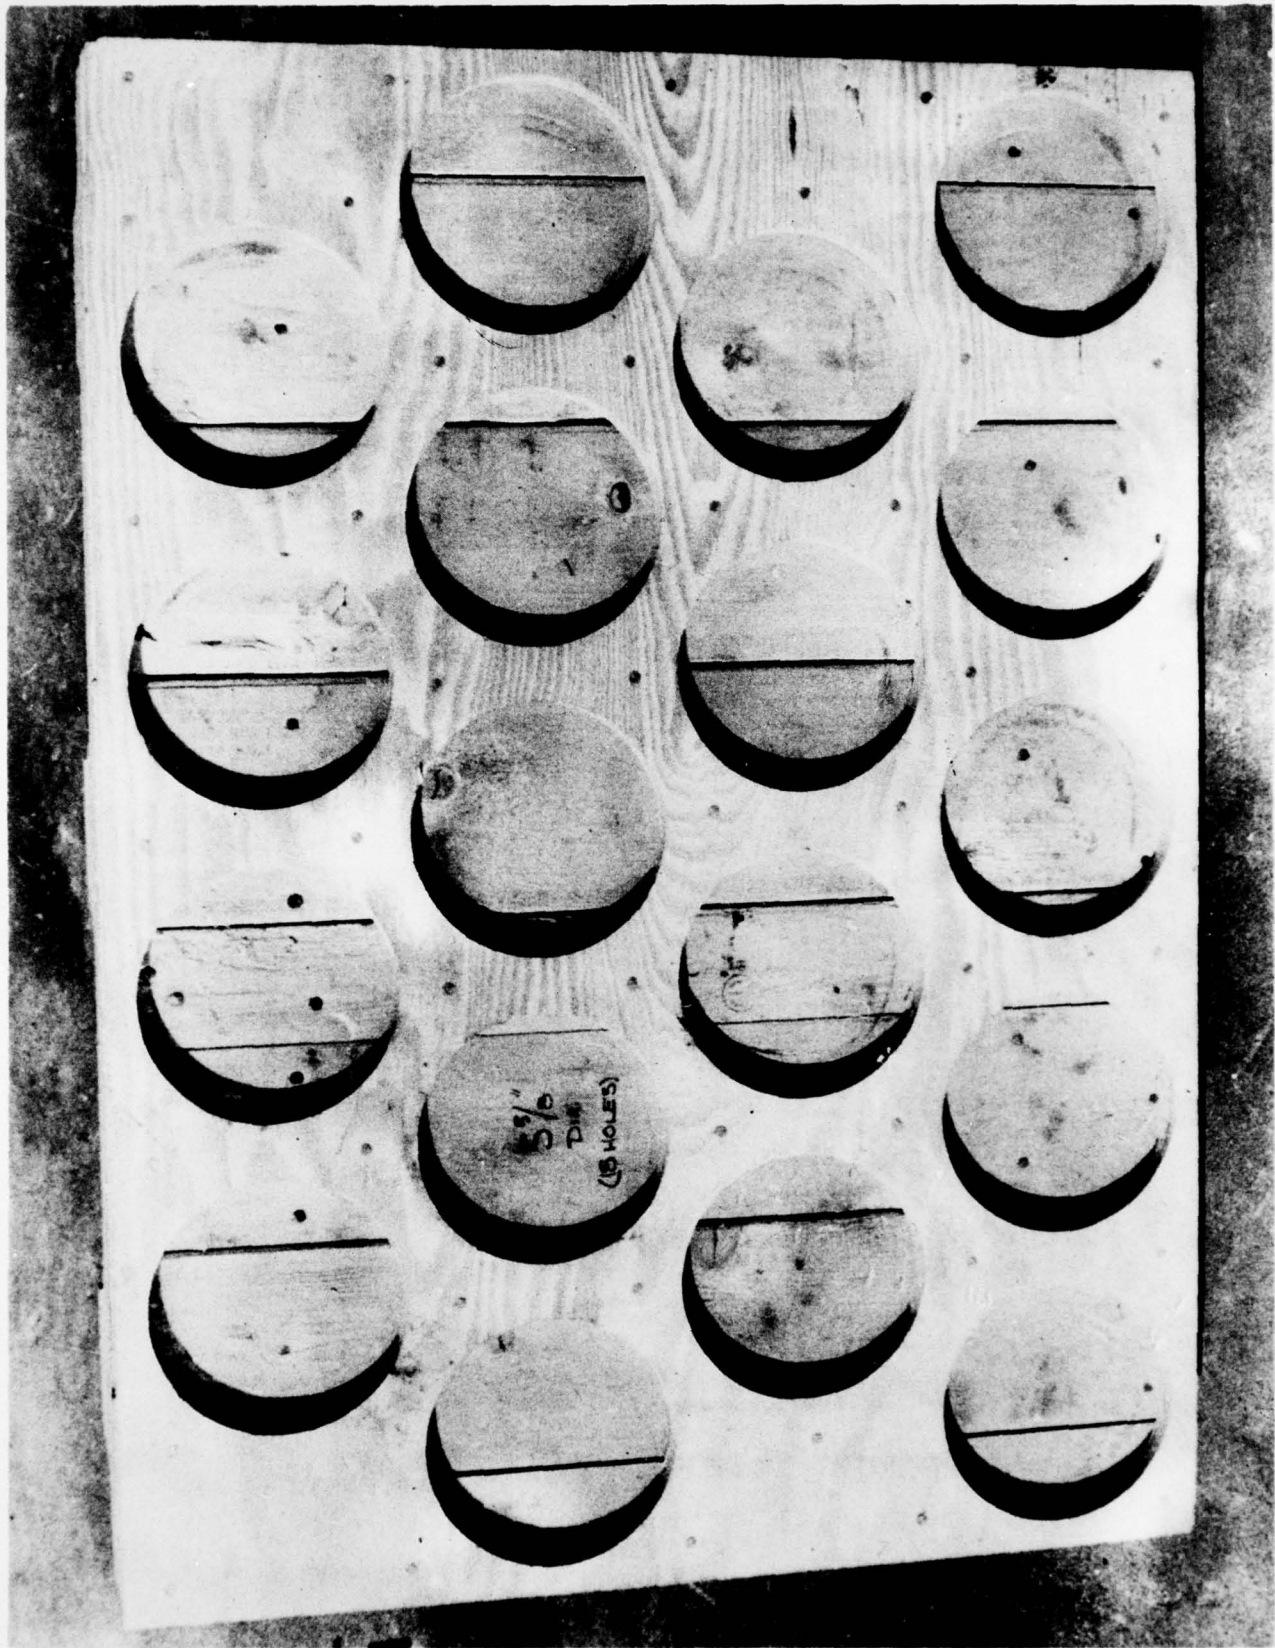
ARMY 155 mm UNIT LOAD BOTTOM ADAPTER PROJECTILE BASE HOLES
